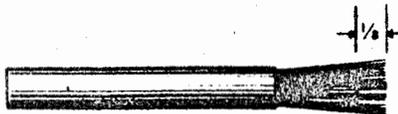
Cable Fabrication, UG-21B/U Plug
